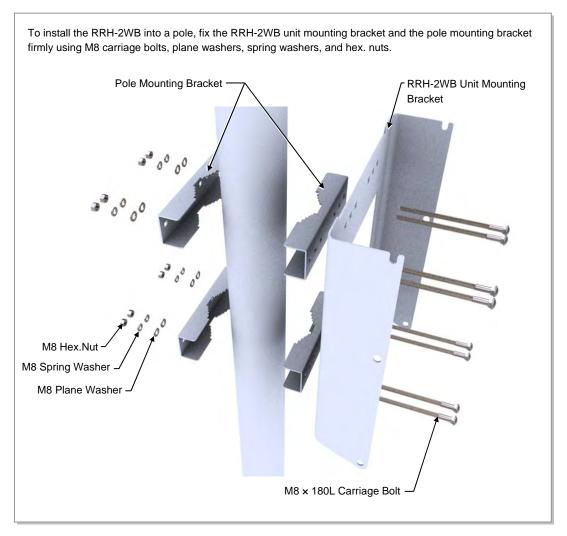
Fixing 1 Sector Pole Type RRH-2WB (1)
